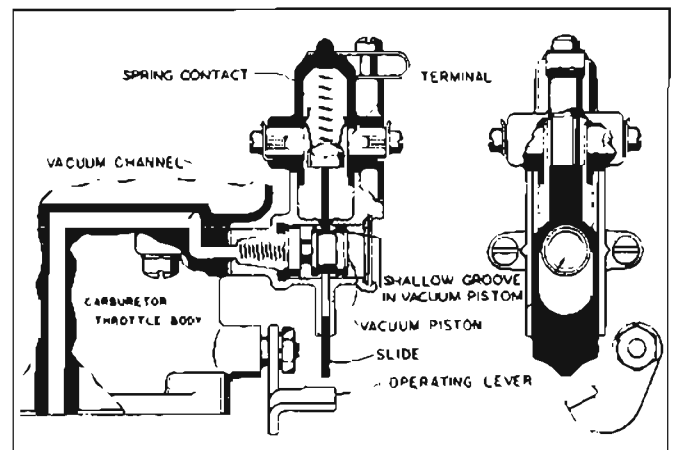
Stromberg Accelerator Vacuum Switch—Engine Running at Part or Open Throttle
